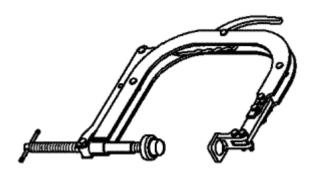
Valve Spring Compressor C-3422-D Courtesy of CHRYSLER LLC
